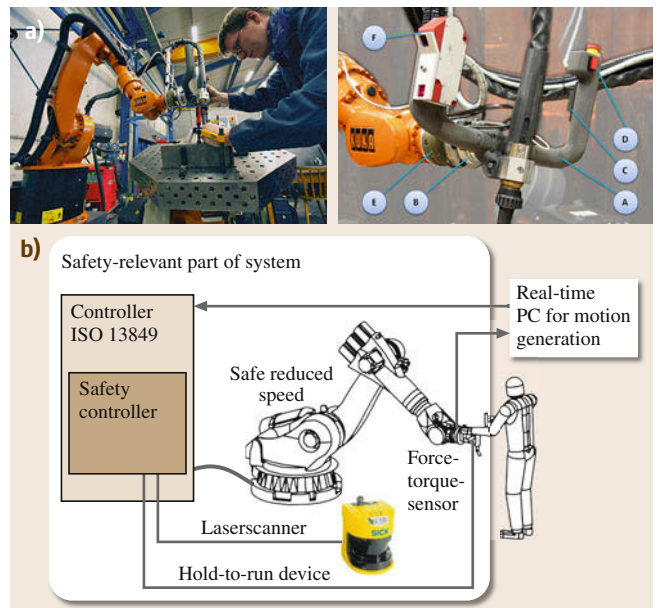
,b Intuitive instruction of a welding robot by lead-through programming: (a) the worker guides the robot by a flange-mounted (B) handle (A) while pressing safety switches (three-position hold-to-run button) (C) on either side. The force exerted on the handle is measured by a force–torque sensor (E) and translated into robot motion. The seam tracking sensor (F) simultaneously measures the workpiece contour for precisely localizing and extracting weld seams. The recorded robot motion is visualized and edited in a simulation environment before task execution. (b) The safety relevant part of the system contains a three-position hold-to-run device, a laser scanner for safety monitoring during automatic program execution and a speed monitoring function during hand-guiding is an operational feature which does not have to be realized with a specific safety integrity level (courtesy of Fraunhofer IPA)
